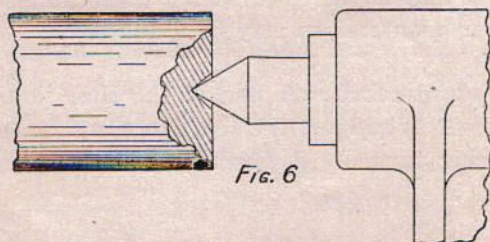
shows a shaft countersunk in such a way that it does not fit on the lathe center, but rests on the point only. This very soon destroys the lathe center and will also ruin the shaft.
